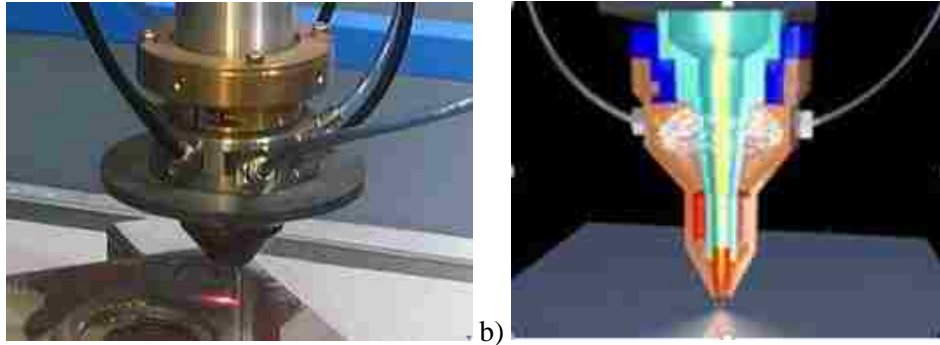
a) A coaxial nozzle with a visible laser spot size used for the experiments b) section view of the nozzle [courtesy of the industrial partner]
